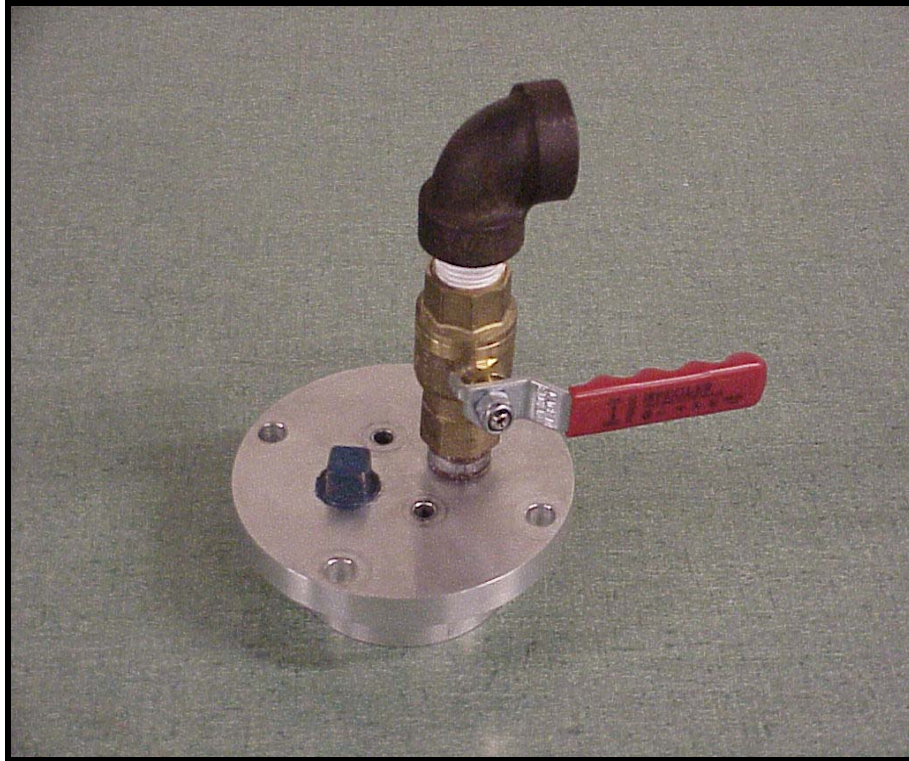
Mounting plug after installation of 17/32-inch diameter relief holes.
